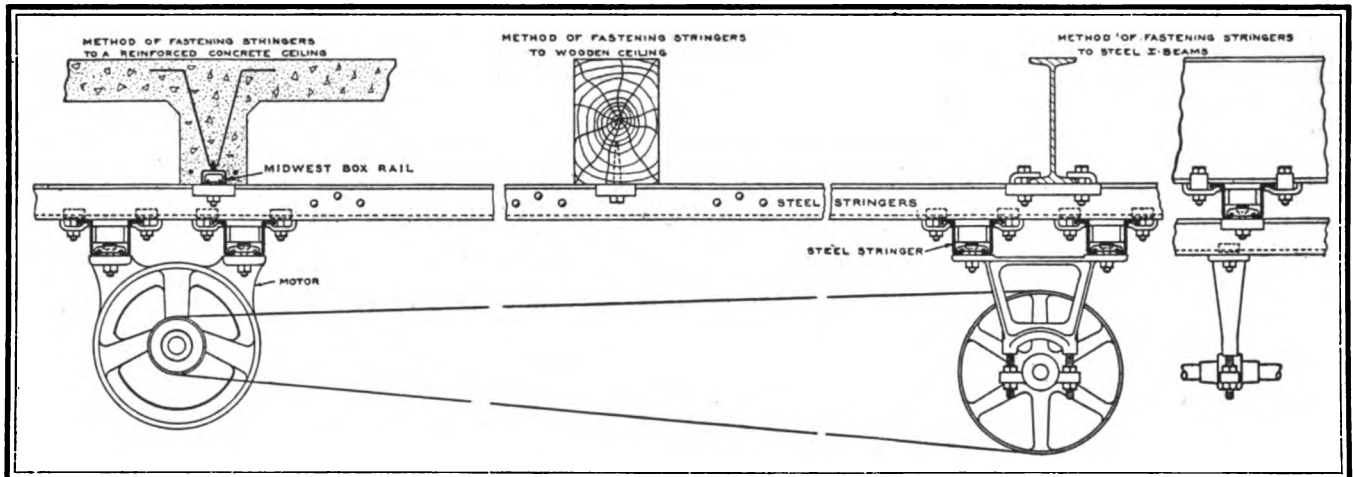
This composite drawing shows three methods of construction for supporting lineshafts.
